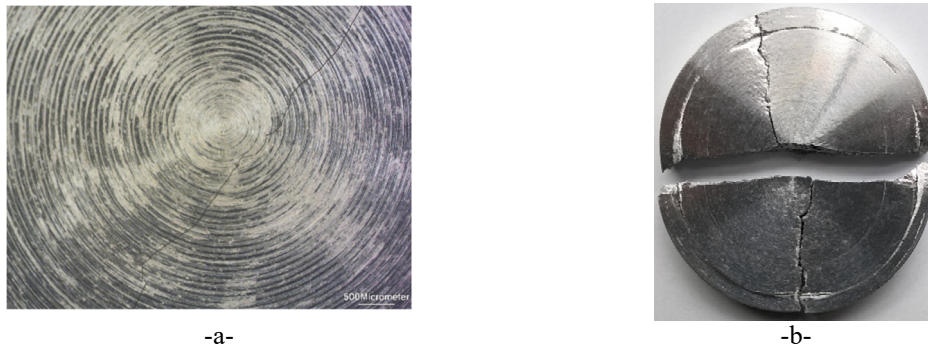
Macroscopic fatigue crack on the lower face of the specimen a) after testing and b) after breaking it under monotonic quasi-static loading.
